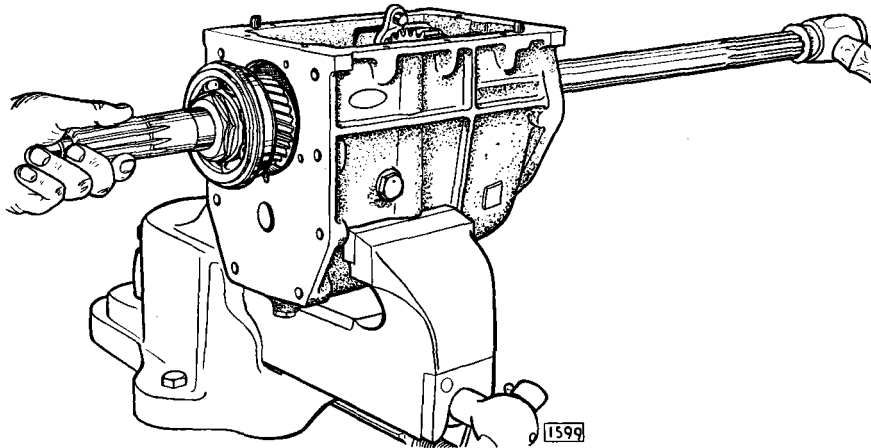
The constant pinion shaft is removed by tapping the mainshaft forward.
